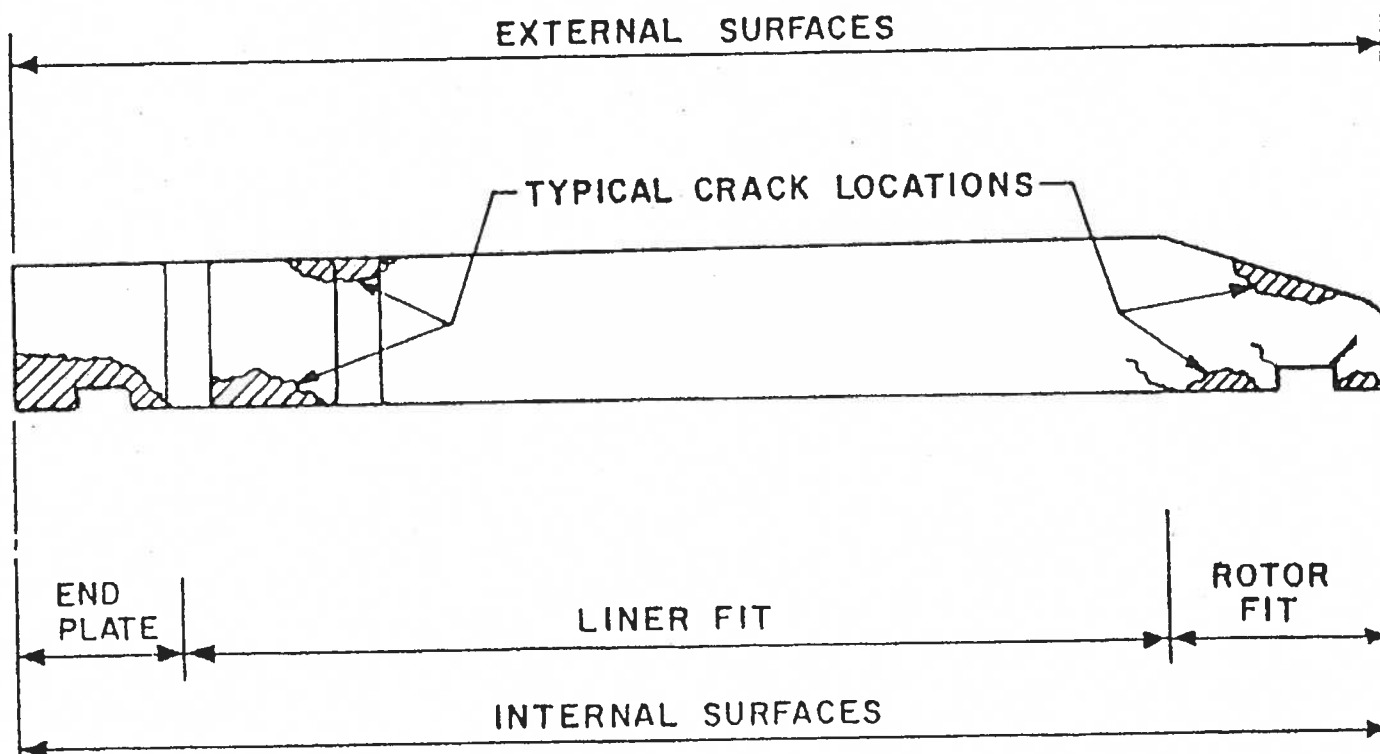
Location of cracks found during In-Service Inspection of Endrings
